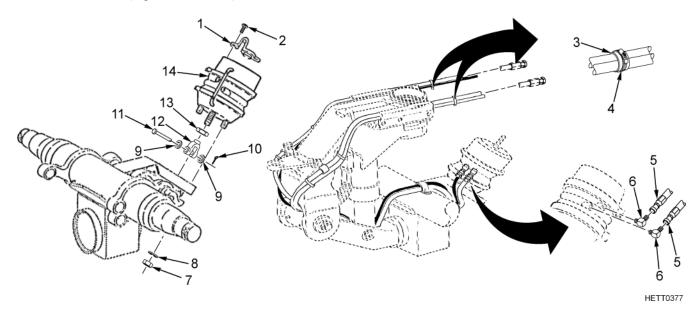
Location C, Brake Chamber Assembly, 10 Places.
